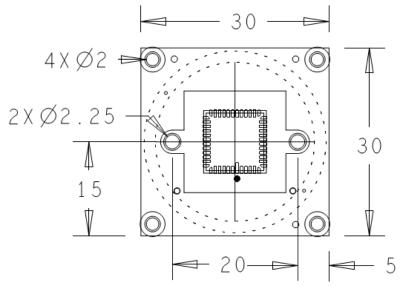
Front Portion of See3CAM\_12CUNIR mechanical dimensions
